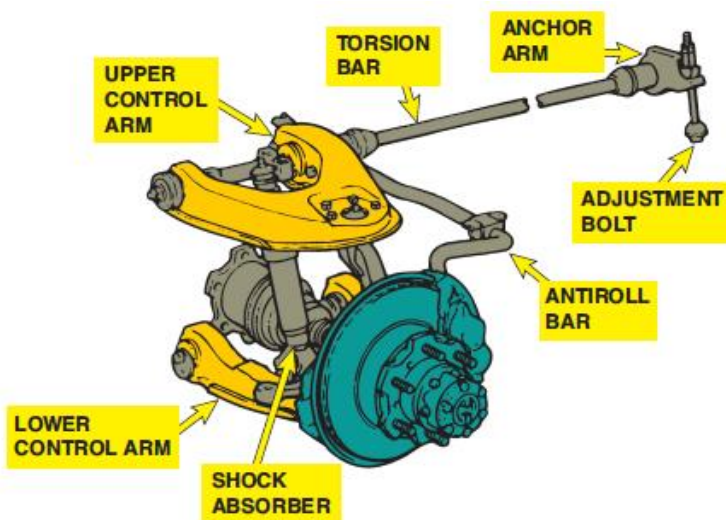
SLA front suspension using a torsion bar spring. This allows space for the front drive axles on four-wheel-drive vehicles.
